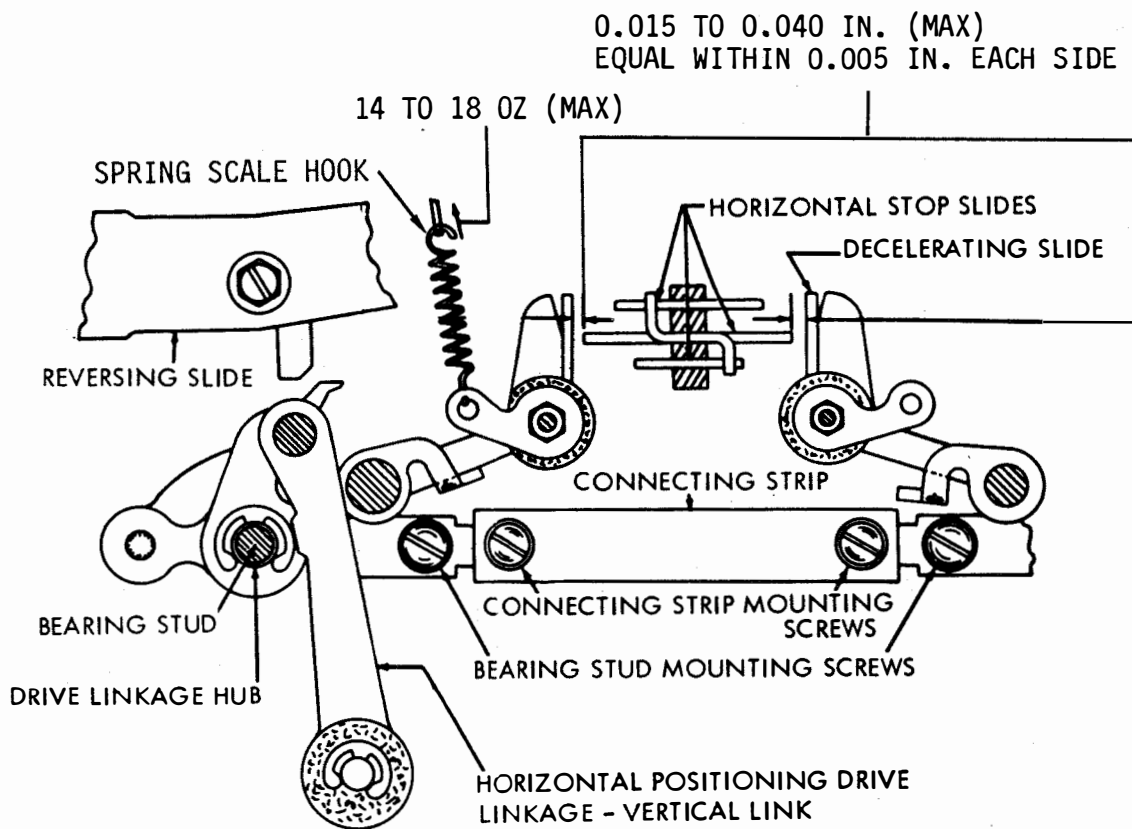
Horizontal Positioning Drive Linkage and Drive Linkage Tension Spring With Earlier Design Drive Linkage and Tension Springs, Front View
